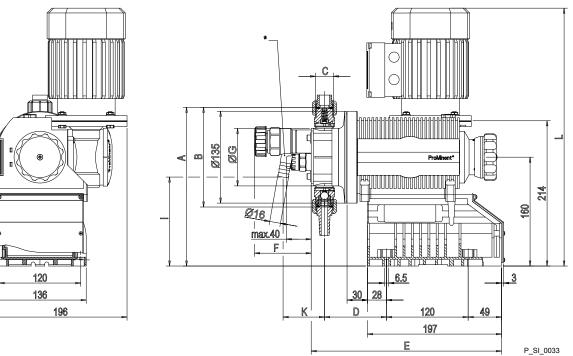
Dimensional drawing of Sigma/ 1, S1Ba - Drawing is not strictly binding.
